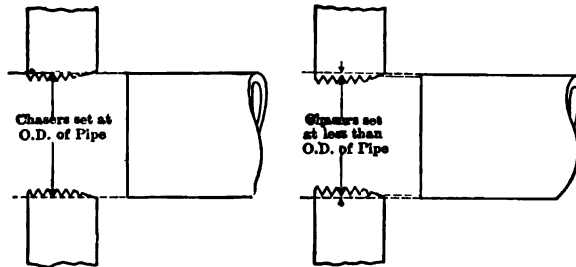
Showing proper and improper depth of chasers as set in die stock.
